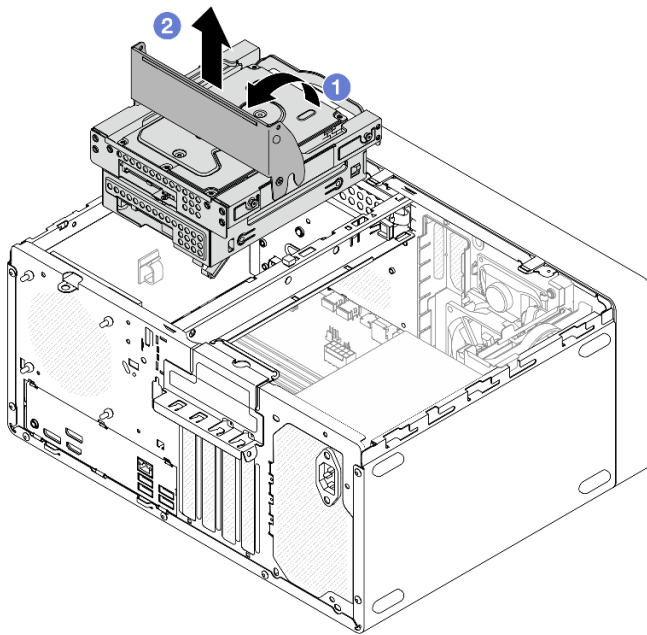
Removing the bay 2+bay 3 drive cage assembly
